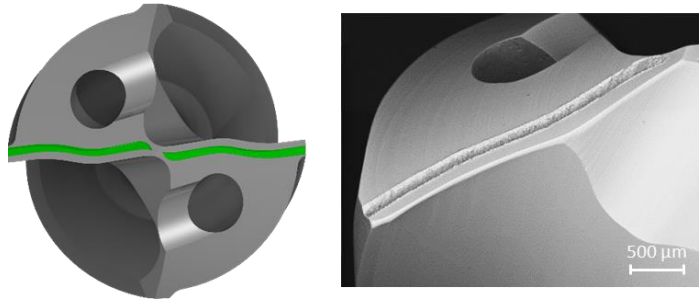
Modified flank face of twist drills for drilling Inconel 718 [9,10]
